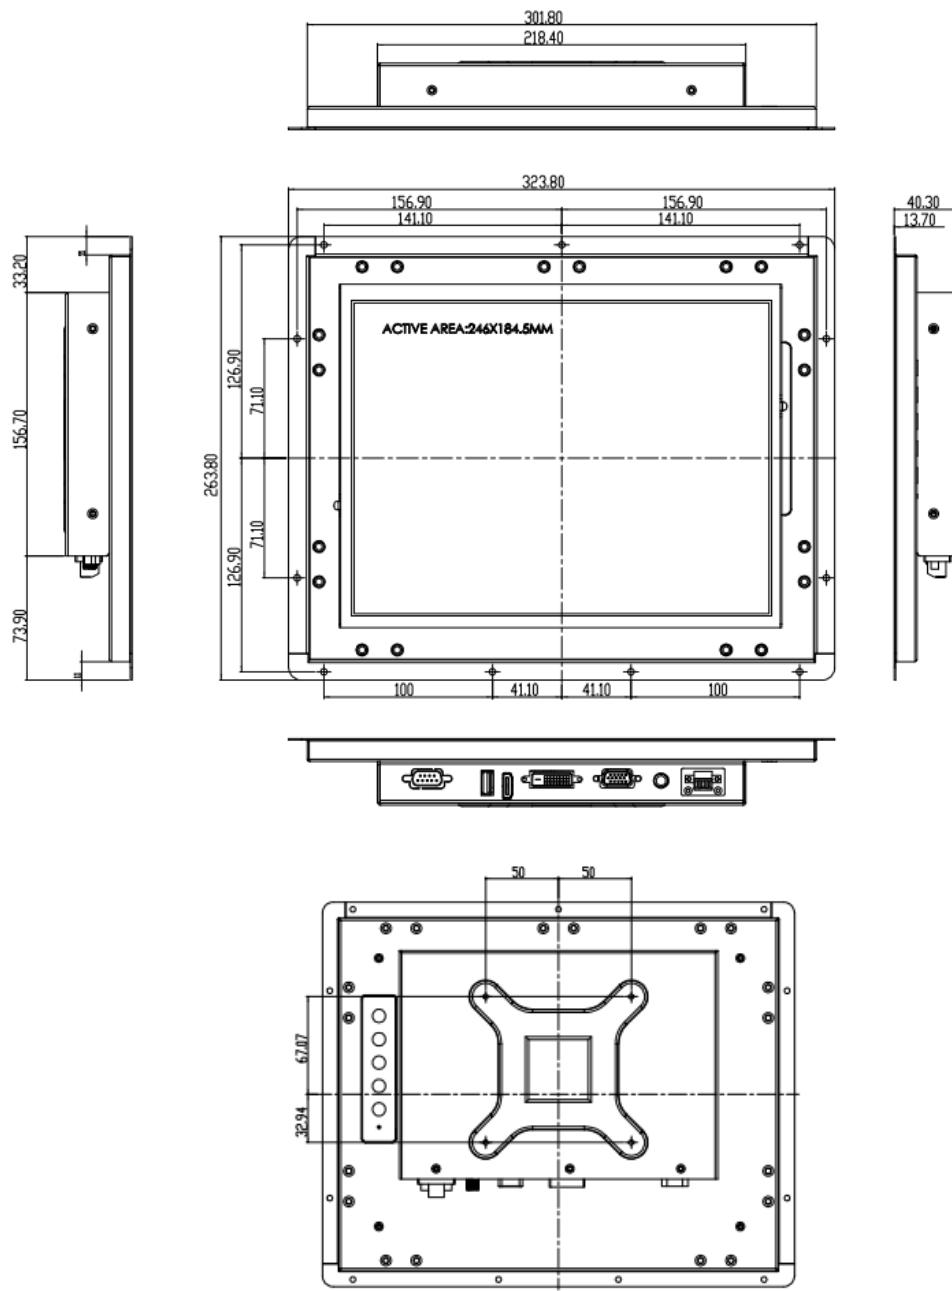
LCD-KIT-F-12A Physical Dimensions (millimeters)
